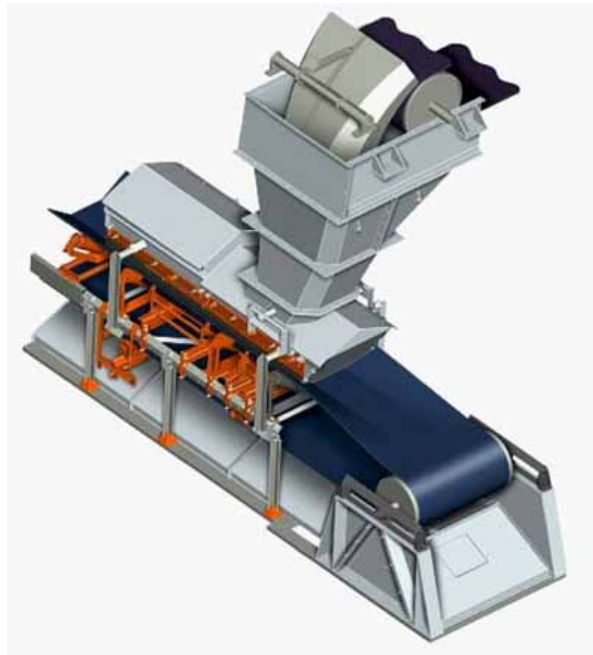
Configuration of belt conveyor and chute at a transfer point [26]
